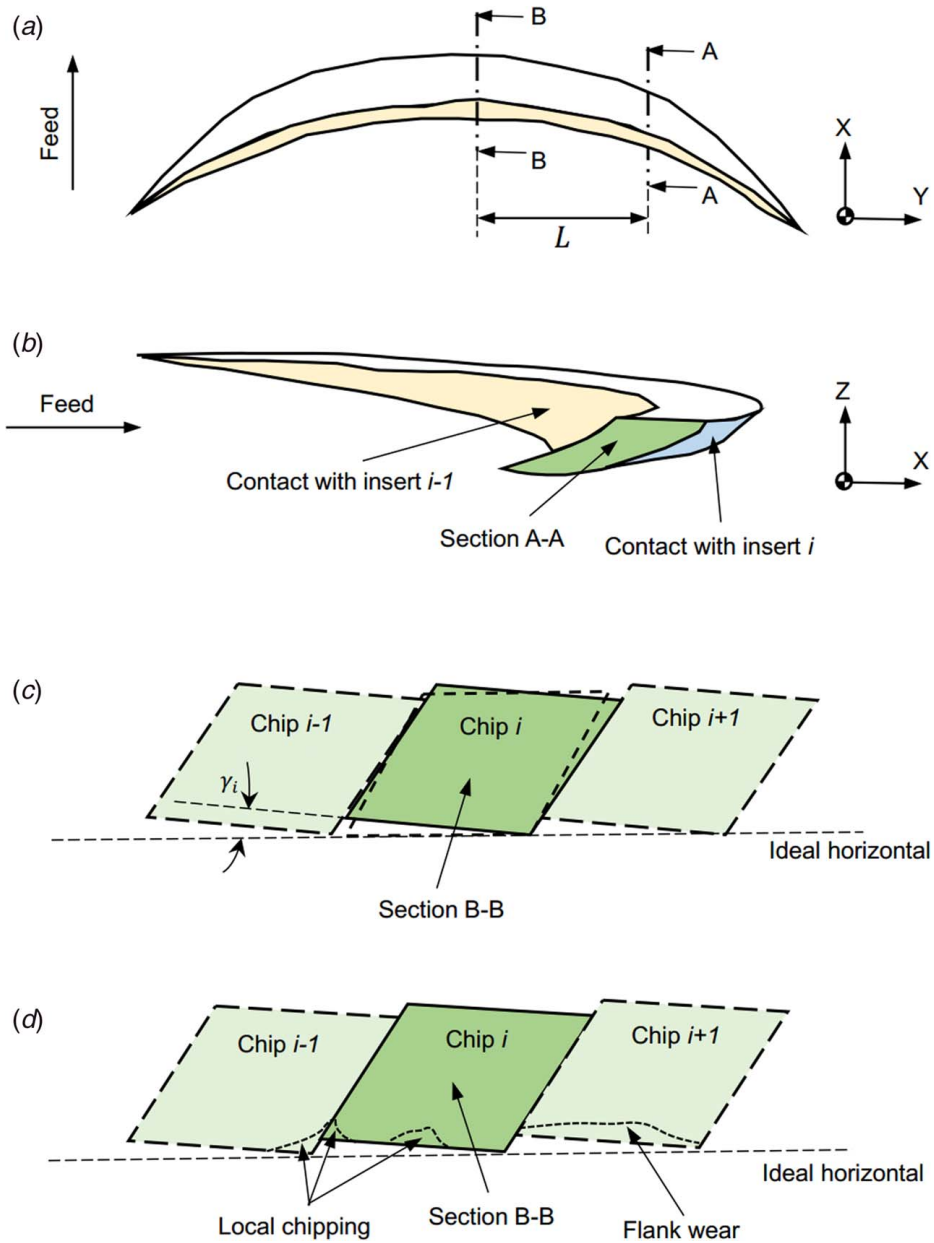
The undeformed chip considering spindle tilt: (a) top view of chip *i*, (b) section A-A of chip *i*, (c) section B-B of chip *i* without tool wear, and (d) section B-B of chip *i* with different types of tool wear
